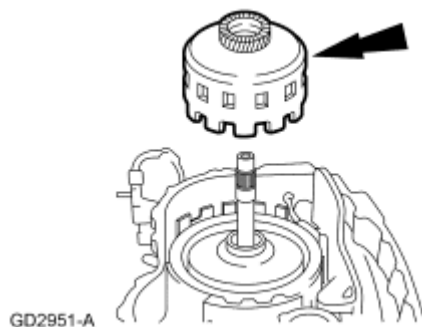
Reverse/Overdrive Sun Gear & Shell Assembly
